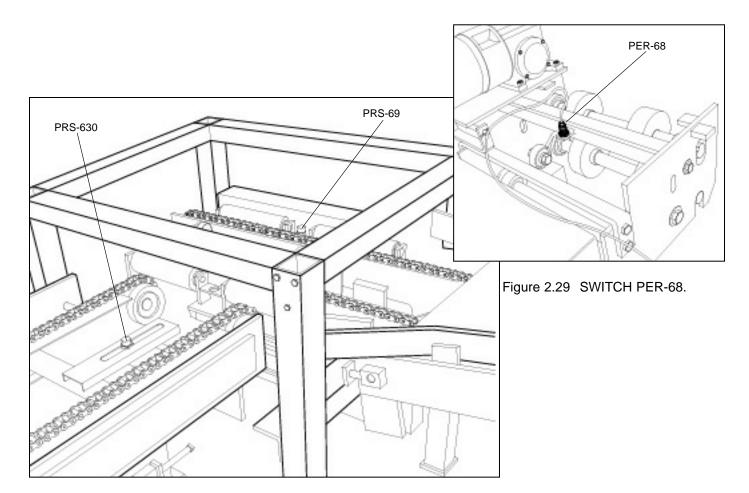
SWITCHES PRS-630 AND PRS-69.
